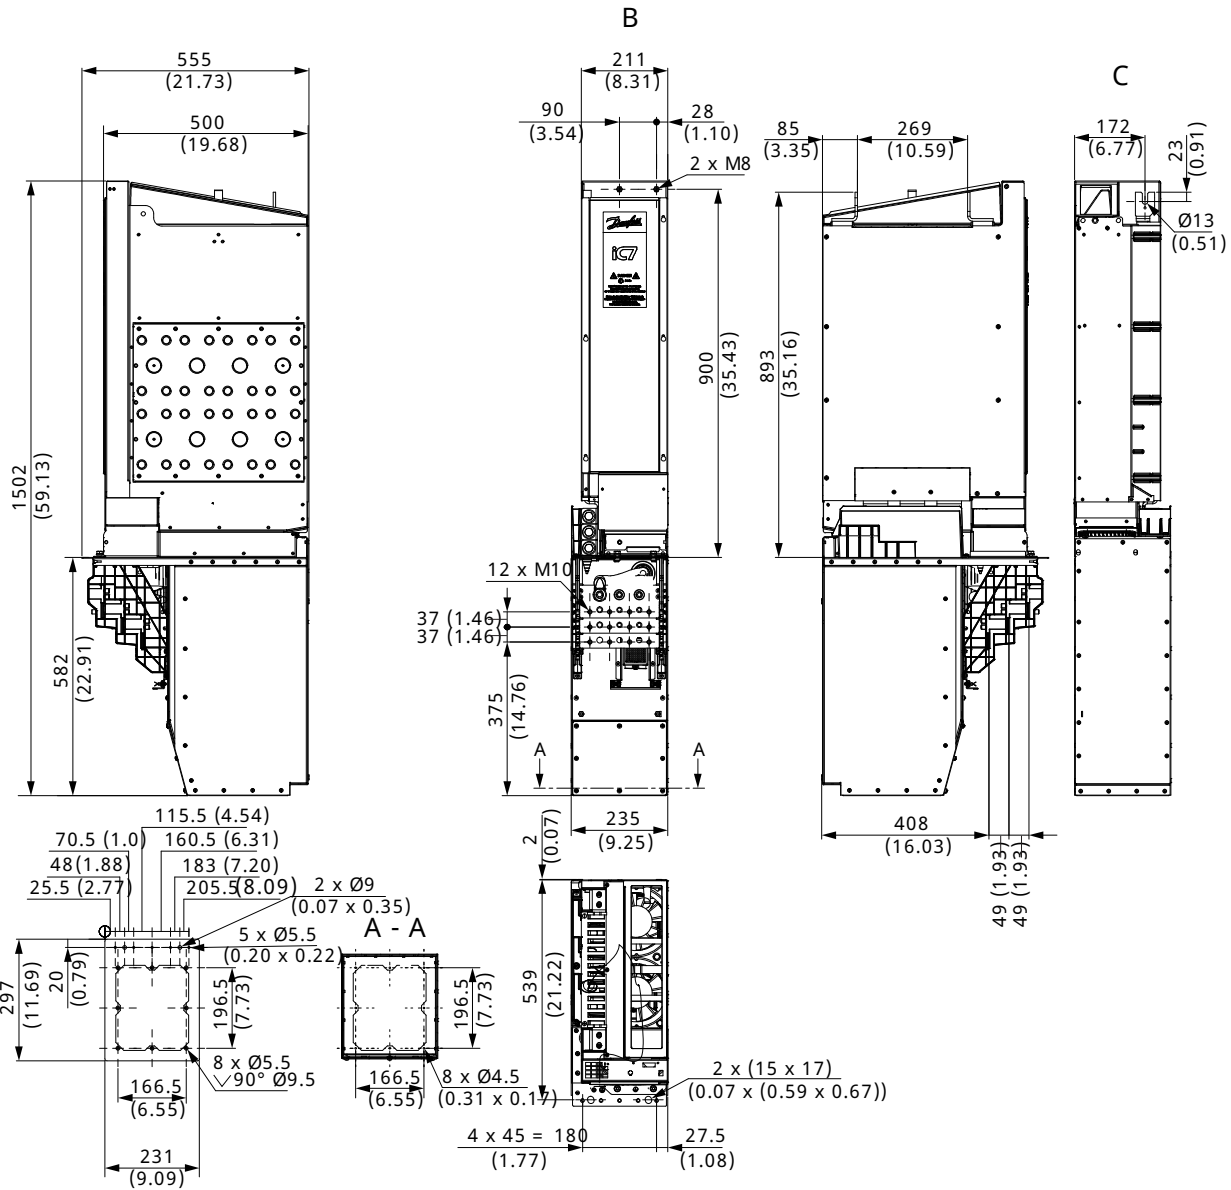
Dimensions of the Inverter Module in mm (in), IR10 with Short Integration Unit
